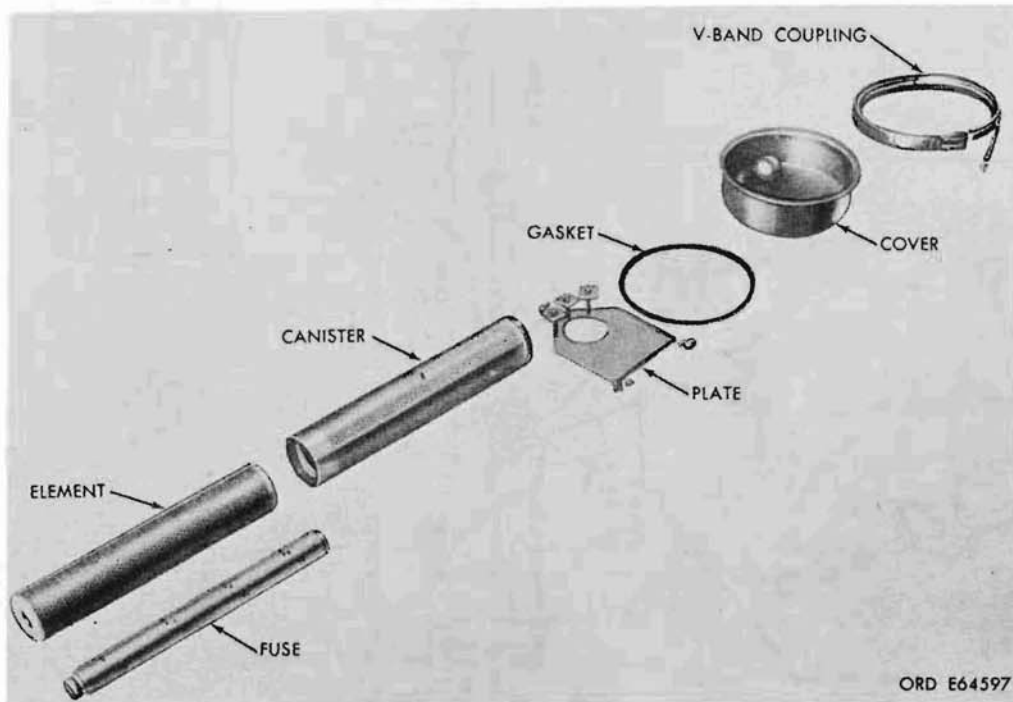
Segregator Filter And Fuse Assembly—Exploded View.
